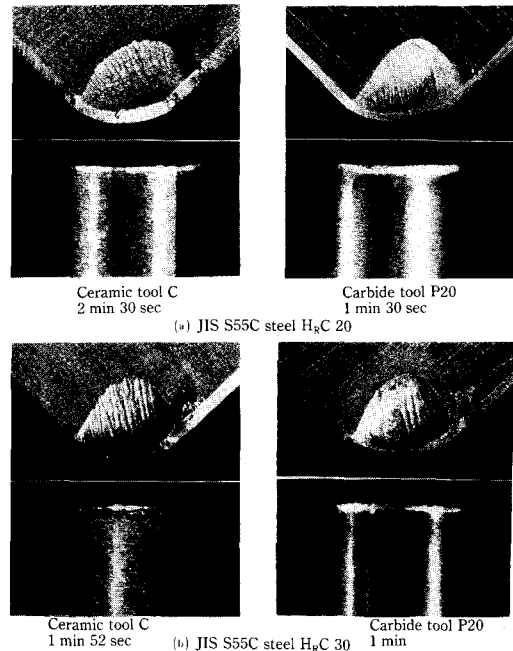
Wear patterns of tested tools in face milling of JIS S55C steel
